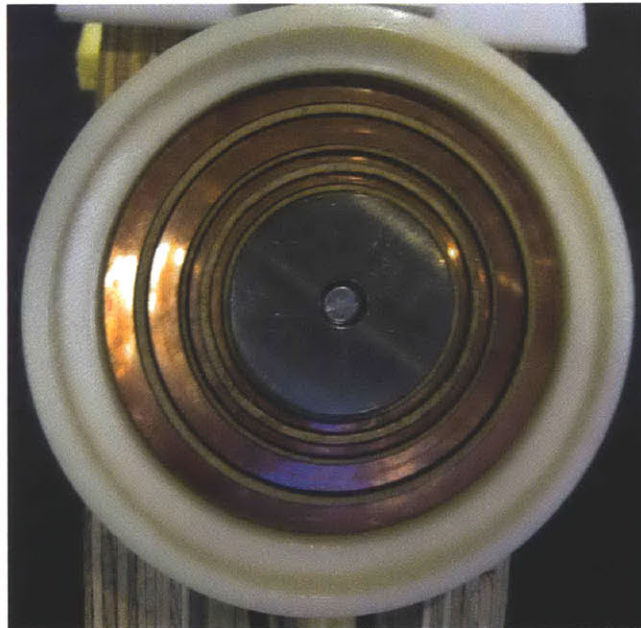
A close-up view of the fabricated female connector assembly. The 3D printed enclosure, fabricated from ABS, sits around the electromechanical interface, which consists of the copper rings, spacers, and the female electromagnet. The entire assembly is held together with a central mounting screw, which connects directly to the vehicle body for stability.
